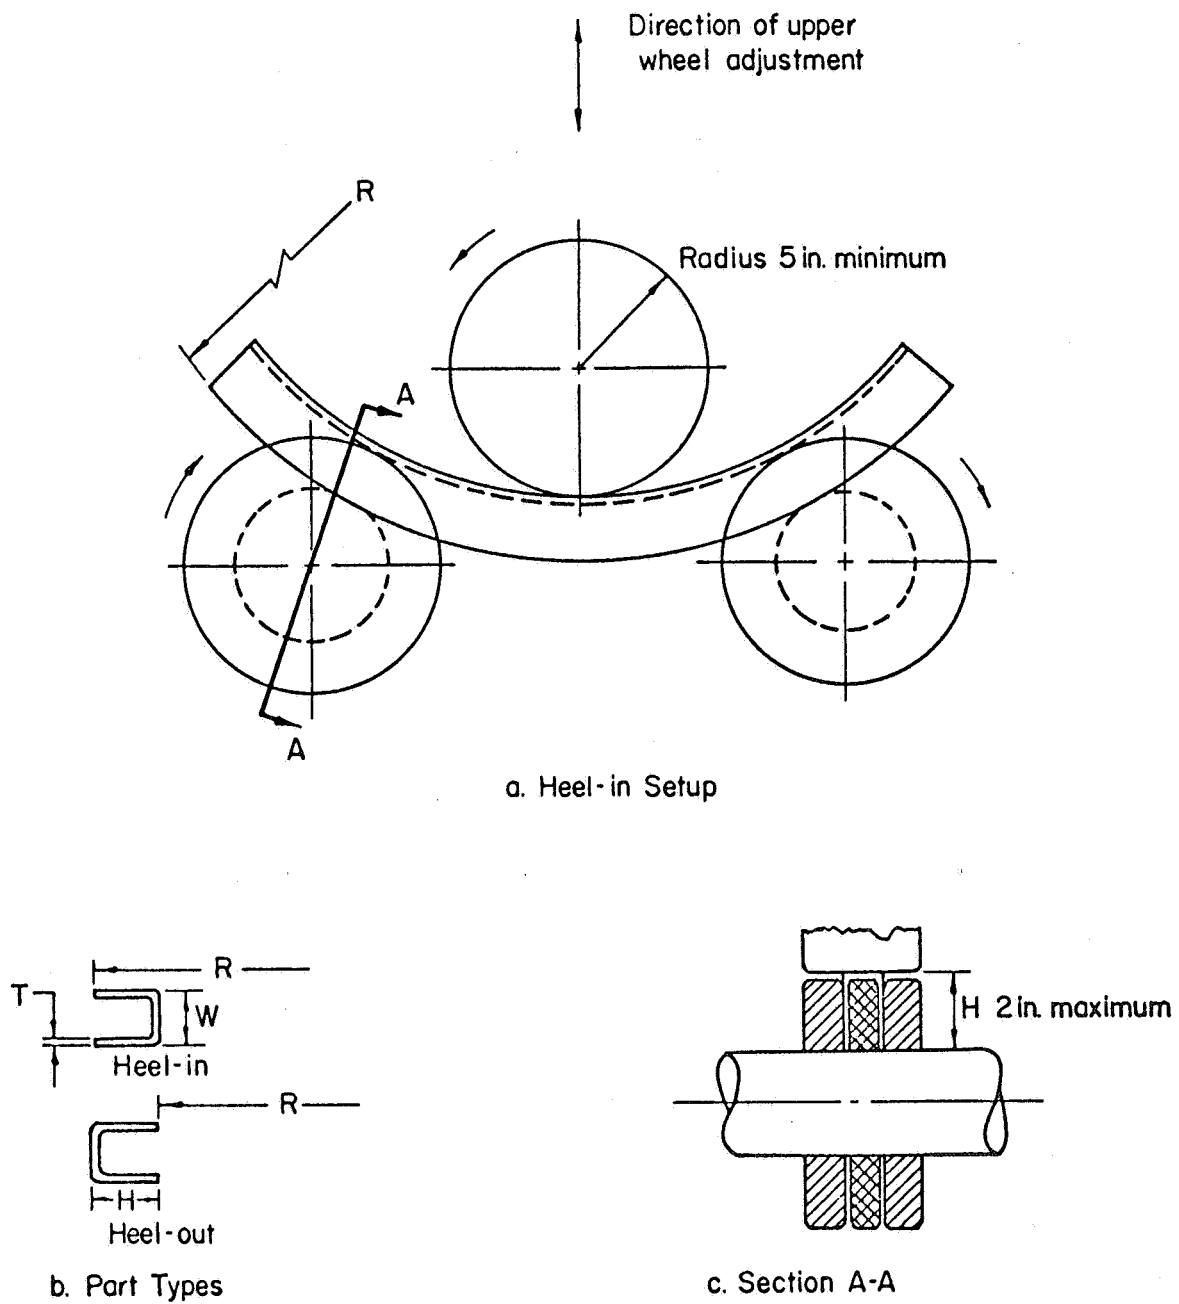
PART TYPES AND SETUP FOR ROLL BENDING (REF. 44)
